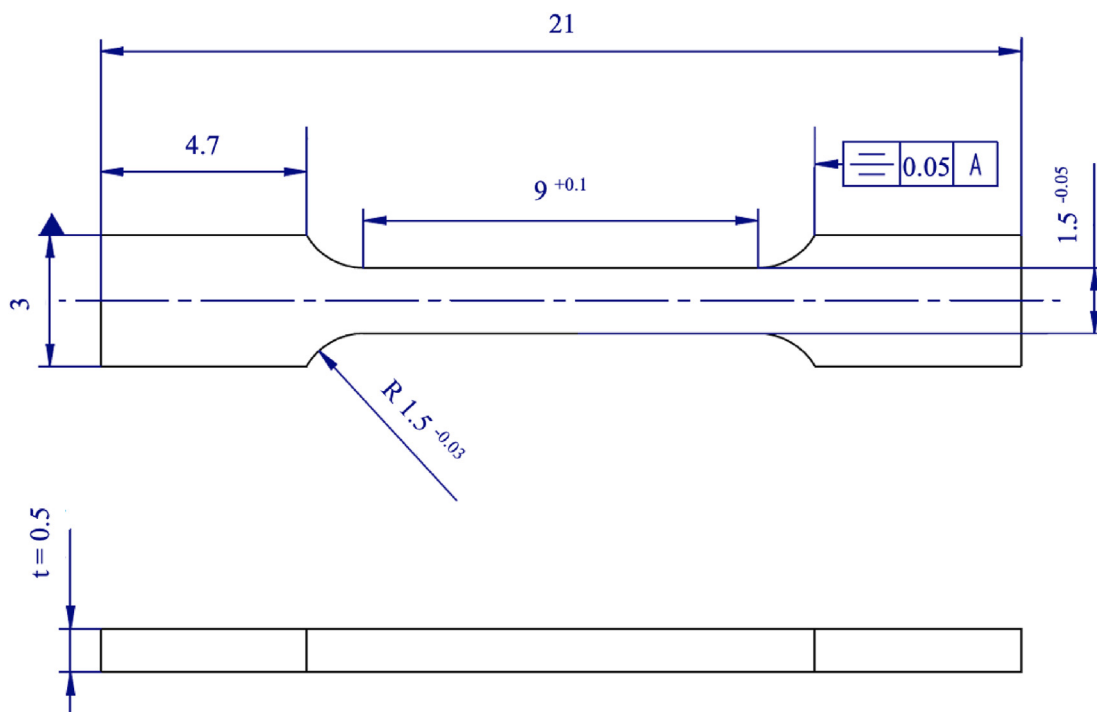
Dimensions of micro-flat tensile specimens. All dimensions in mm.
